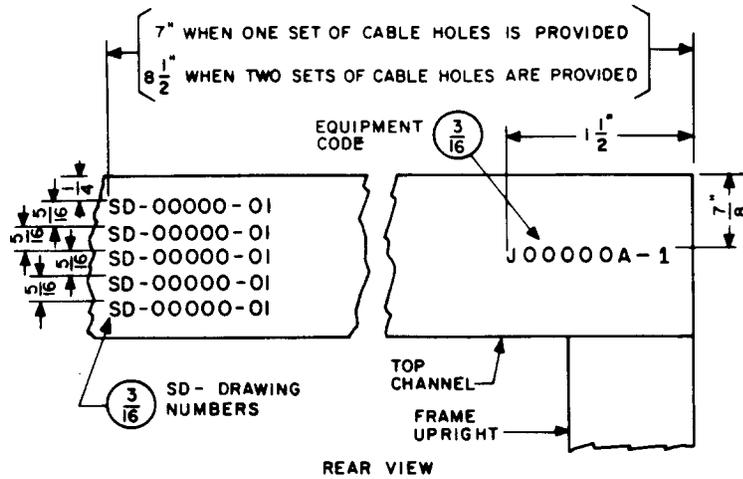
Frame Equipment Code and SD- Drawing Numbers
